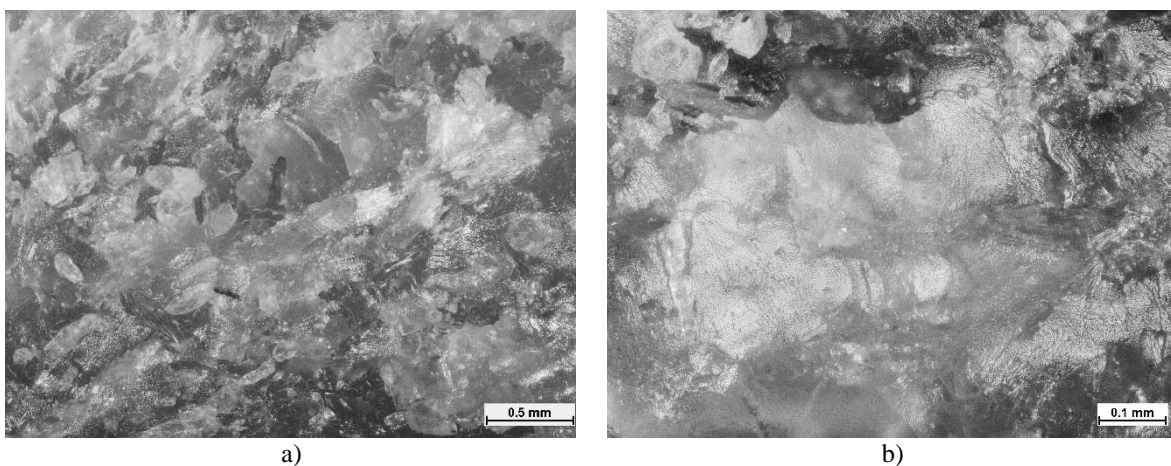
Morphology of the fracture surfaces of the PLA/PHB (80:20) samples after mechanical testing containing 10 wt% of wood fibers: impact fracture surface at a) 2.5x and b) 10x
